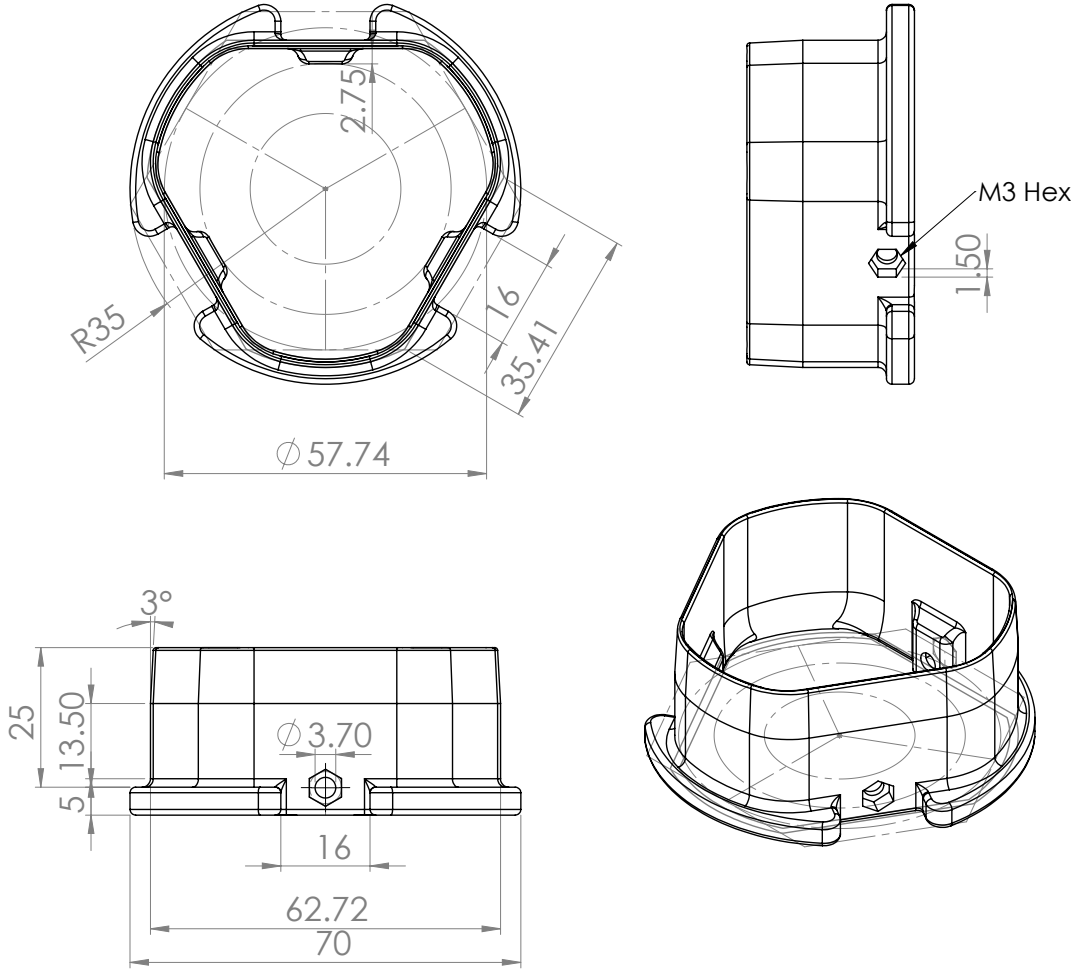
Technical drawing of the 3D printed outer sheath reservoir in the FU (mm). Final prototype.
